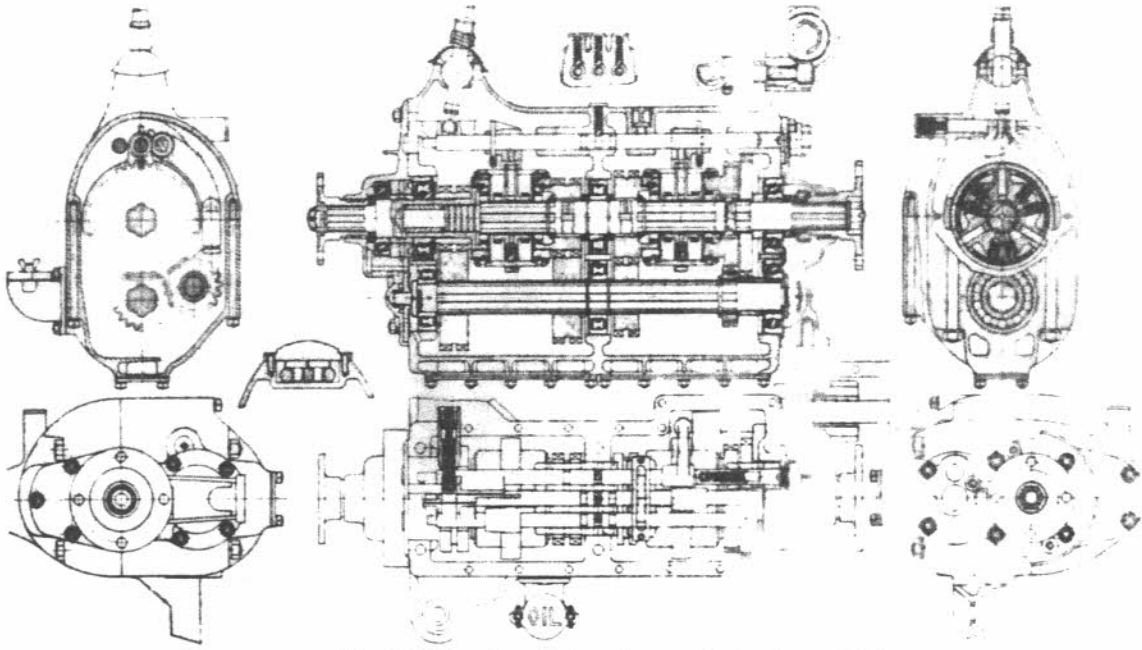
Four-Speed, Synchro-mesh Gearbox, 1934
